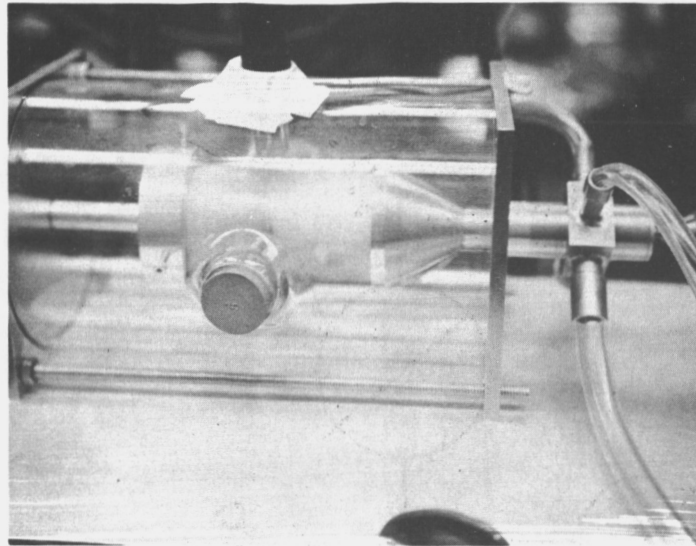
Welding Test Set-up for Purging the Inside and Outside of the Tube with Argon.
